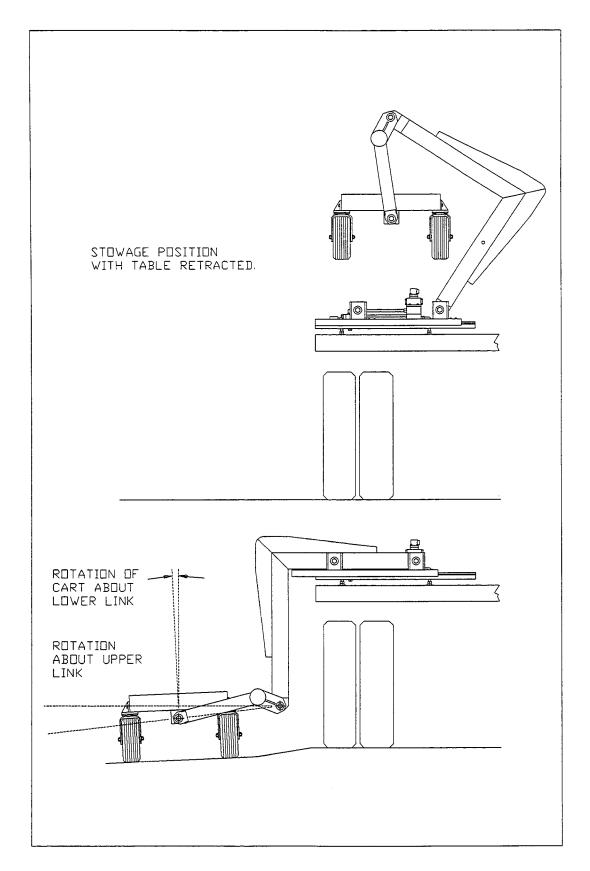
Motion Of The Longitudinal Machine.
